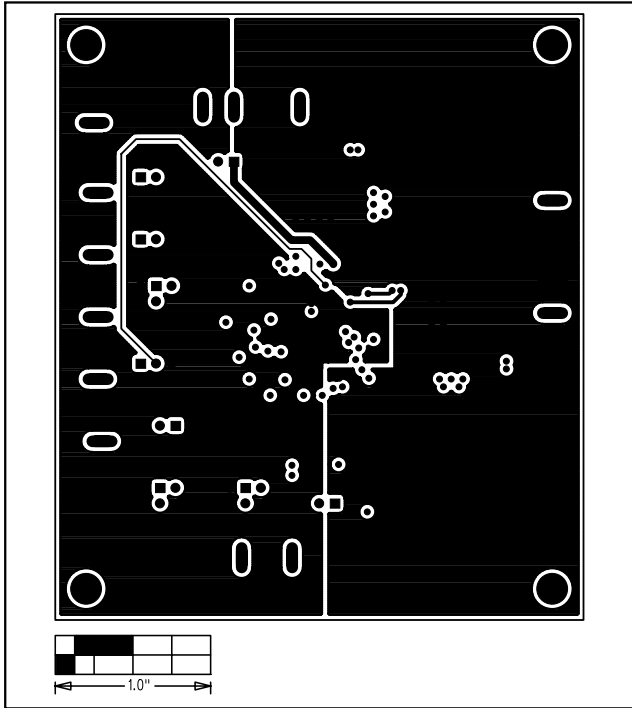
MAX1541 EV Kit PC Board Layout—Ground Layer 3
